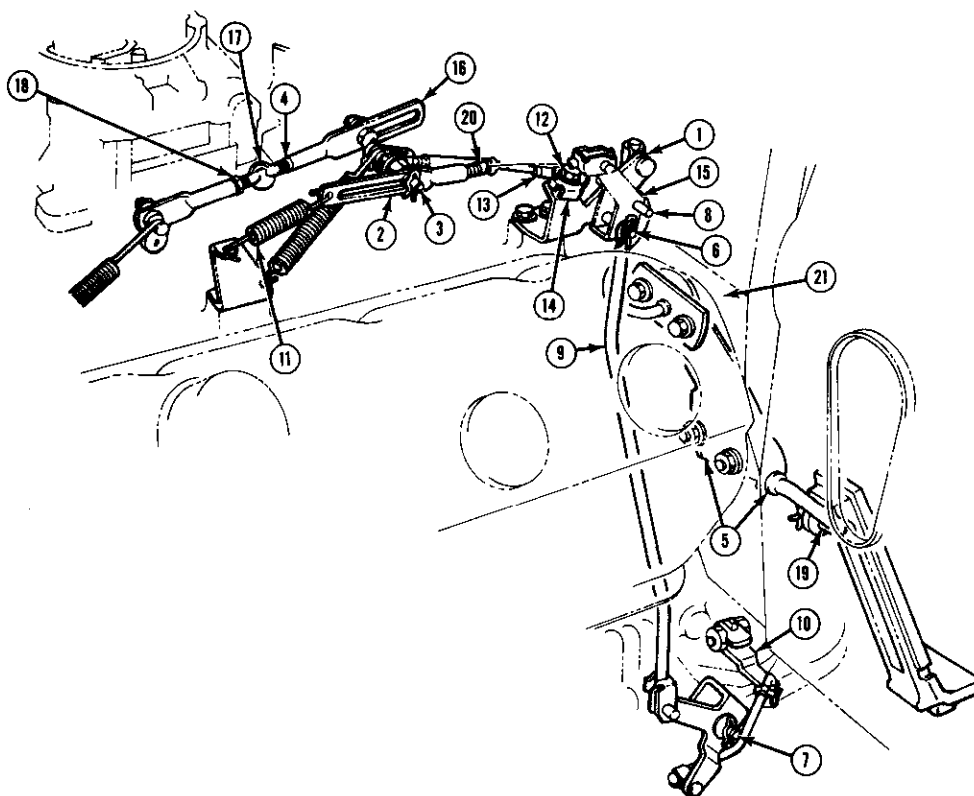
Throttle Linkage Adjustment (426 Hemi Engine)
